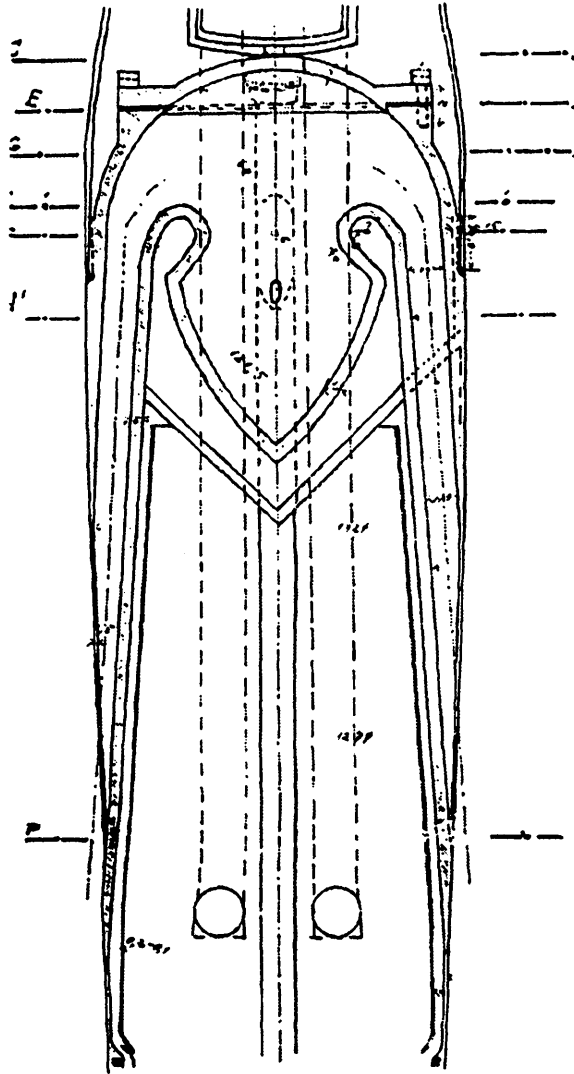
The drawing gives a cross-sectional view of the upper part of the rocket with the combustion chamber.
